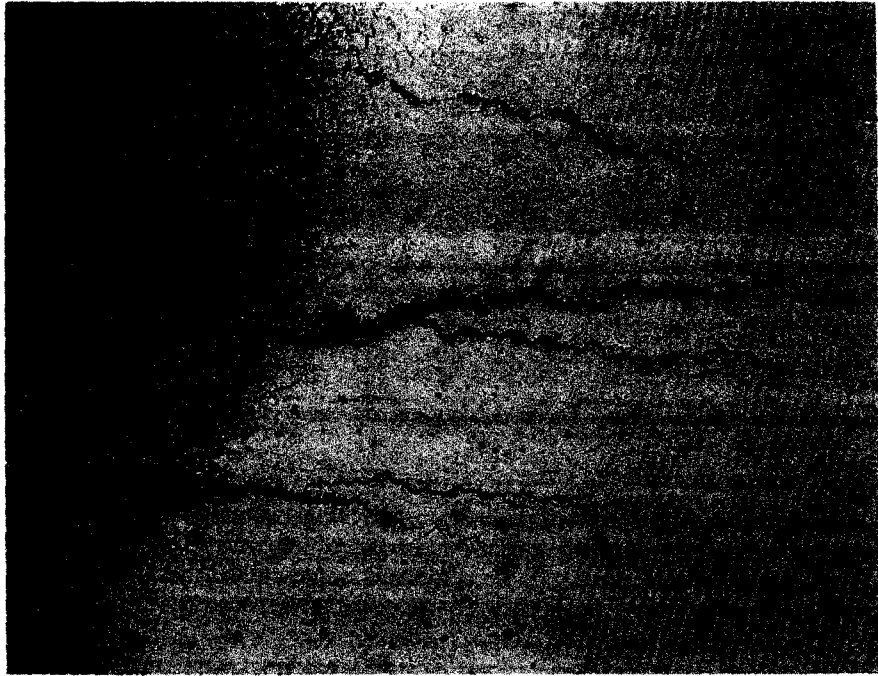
Coring in an Inconel 718 Seam Weld (Area Filled with Dendritic Material)
